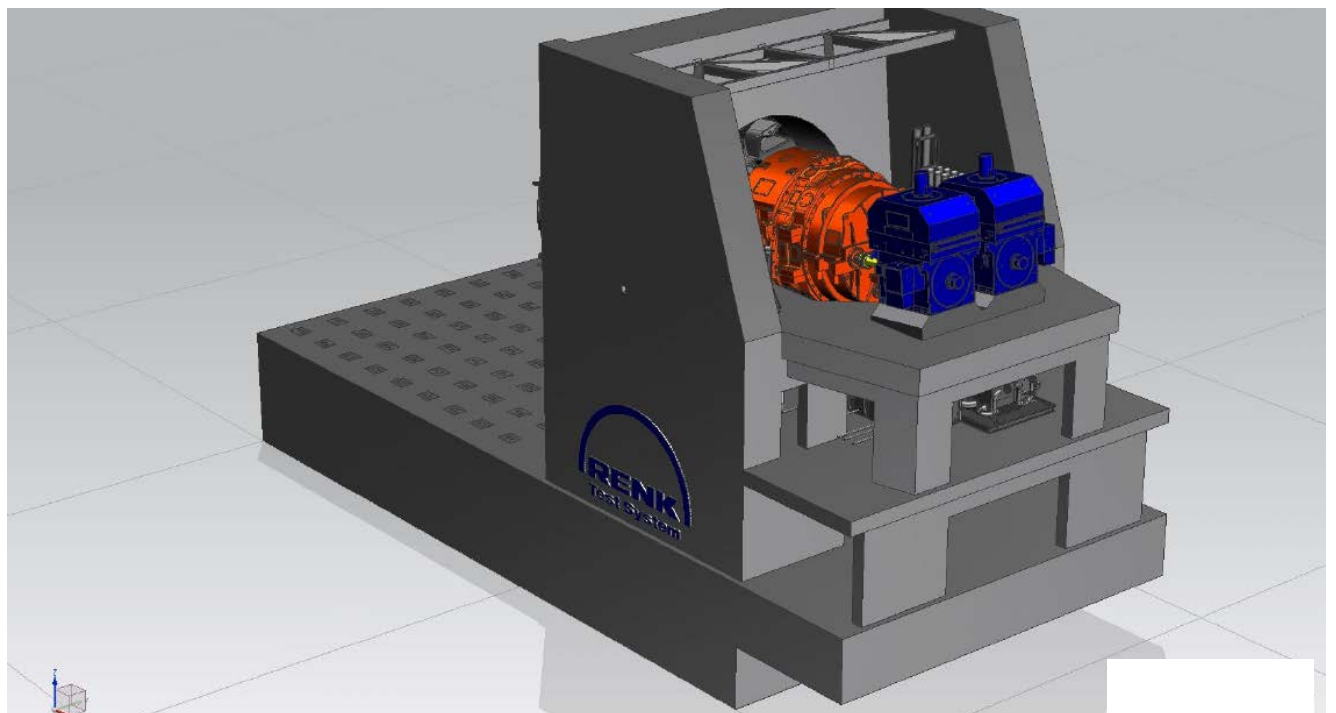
15 MW Motor and Gearbox Configuration, Rear View, Design Phase.
